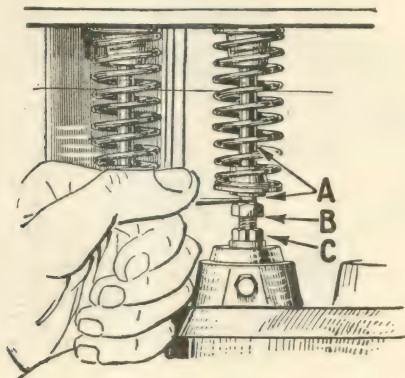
ADJUSTING SIDE VALVE CLEARANCES (AUSTIN 10)
